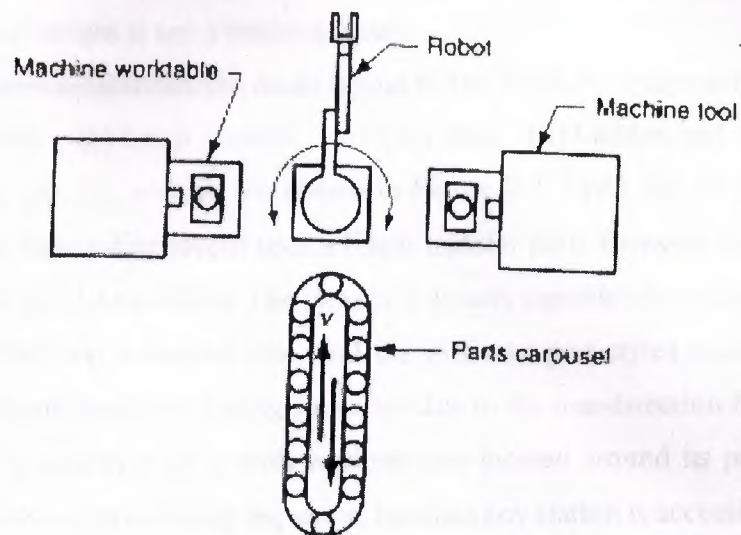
Automated manufacturing cell with two machine tools and a robot.
